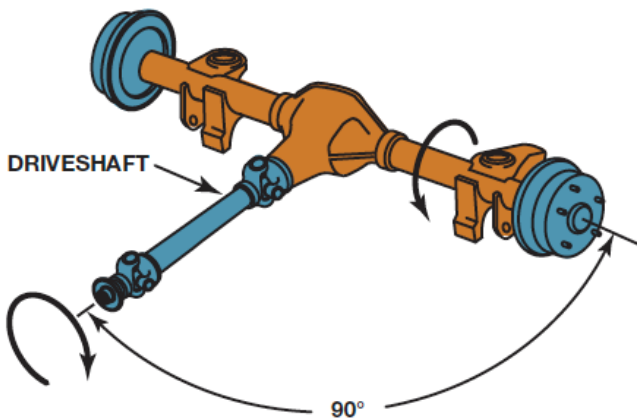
The drive axle assembly changes the direction of engine torque and increases the torque to the drive wheels.
